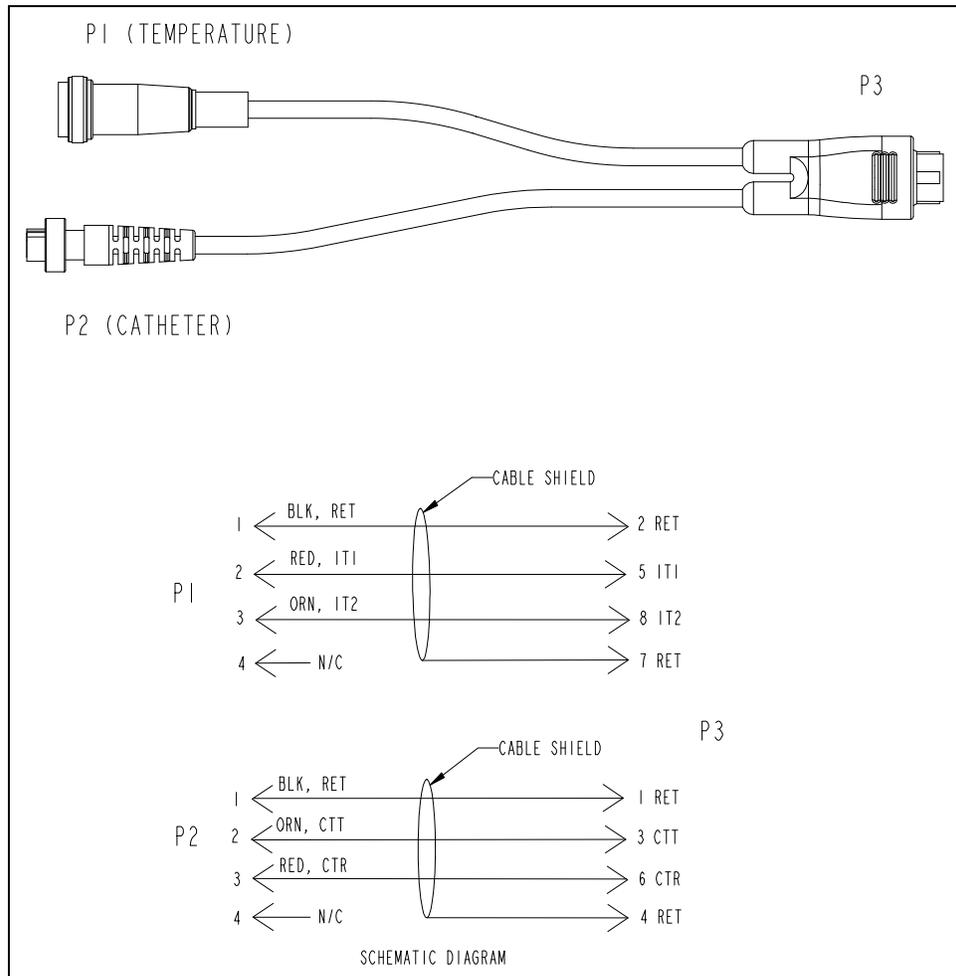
Cardiac Output Cable (P/N 0012-00-1447-01)
